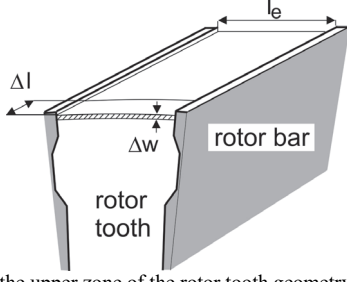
Sketch of the upper zone of the rotor tooth geometry.
